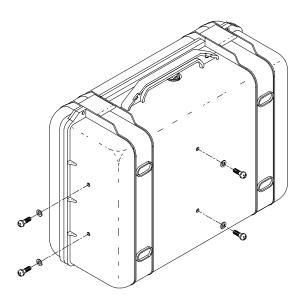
Removing BARS Panel Assembly Retaining Screws and Washers
